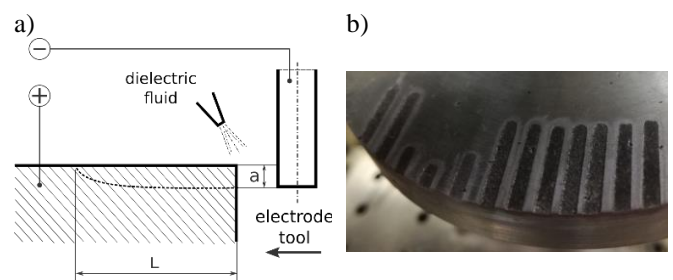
Scheme of investigated machining variant (a) and photography of the machined sample with groves (b); a – layer depth; the electrode does not rotate during machining.
